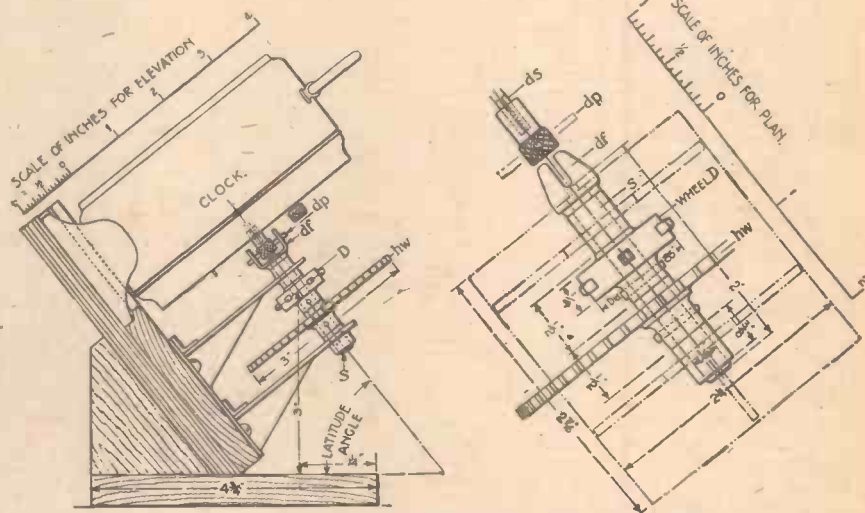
Side view of driving clock and slow-motion hand-wheel with plan of drive.
